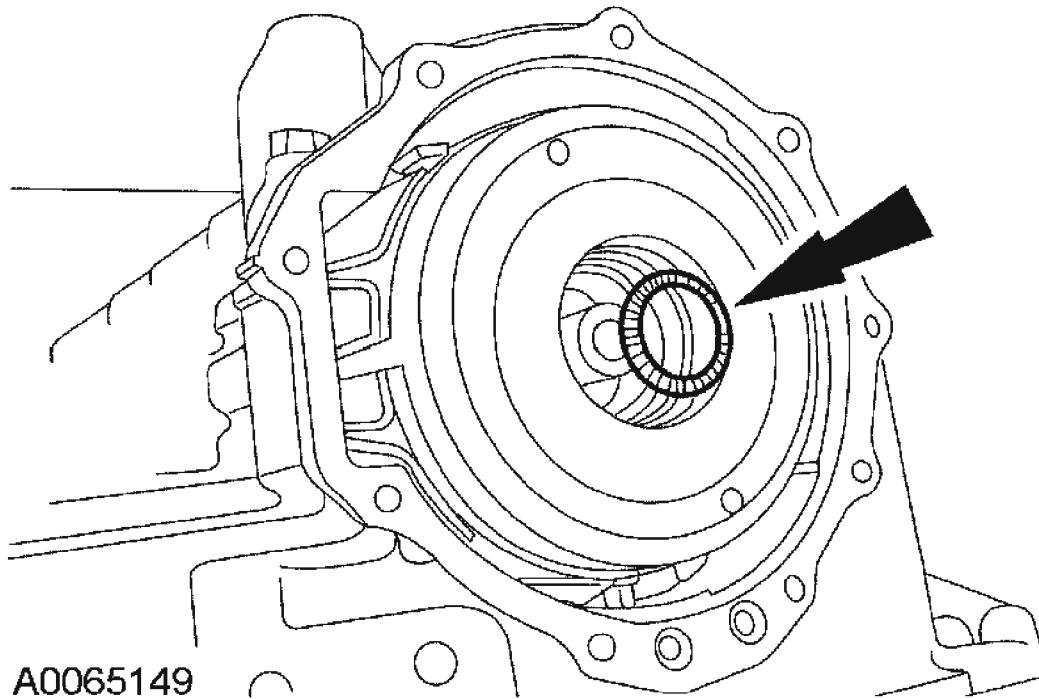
Removing Direct Clutch Cylinder Thrust Bearing
